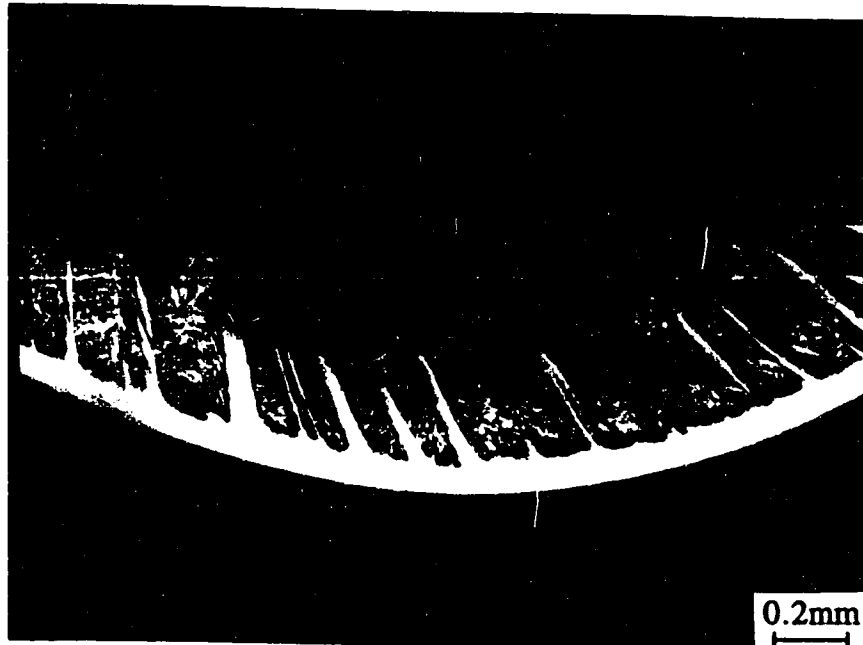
(a): Optical micrograph of a partially segmented chip obtained at a cutting speed of 75 m/min., showing transformation shear band located parallel and at an angle to the tool-chip interface at cutting speed of 75 m/min in machining of Fe-28.9wt%Ni-0.1wt%C alloy with the use of a coolant. The chip morphology is same as in dry machining.
